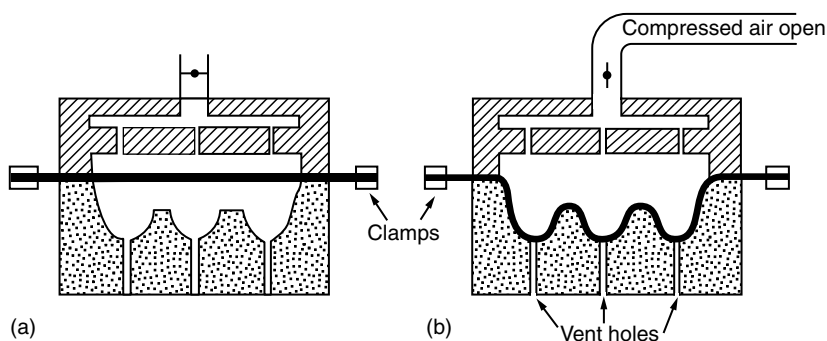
Pressure forming: (a) heated sheet is clamped over mold cavity; (b) compressed air pressure forces the sheet into the mold.
